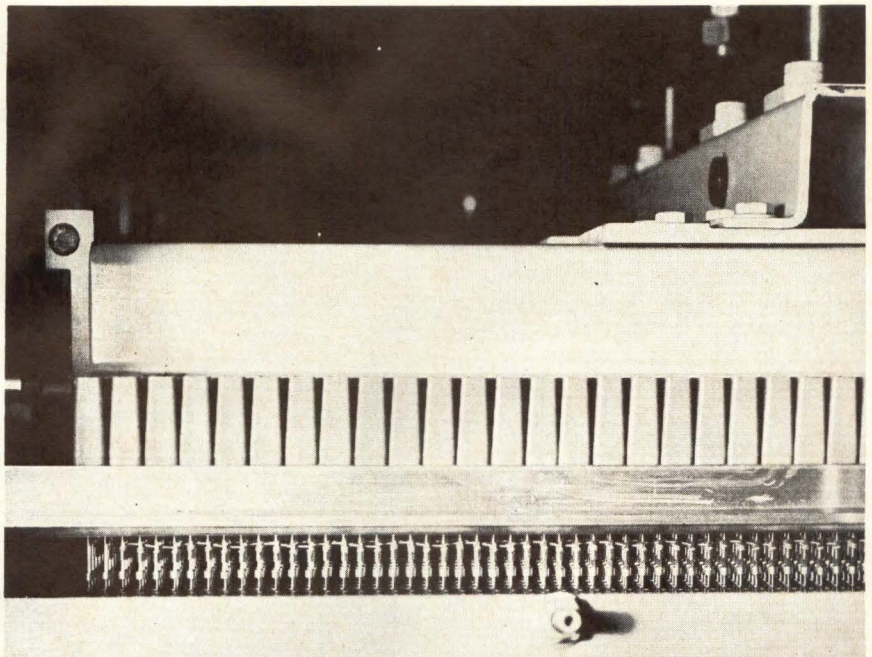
Side view of spring-pin access fixture with back-plane in engaged position.
